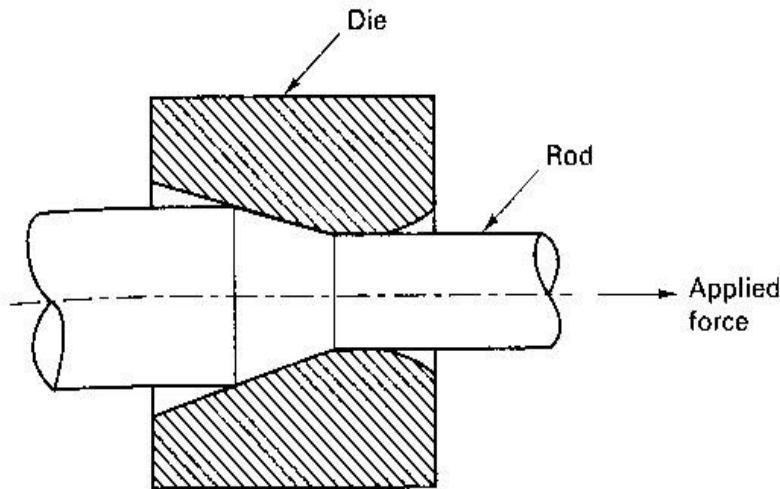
Schematic diagram of the rod or bar-drawing process.
